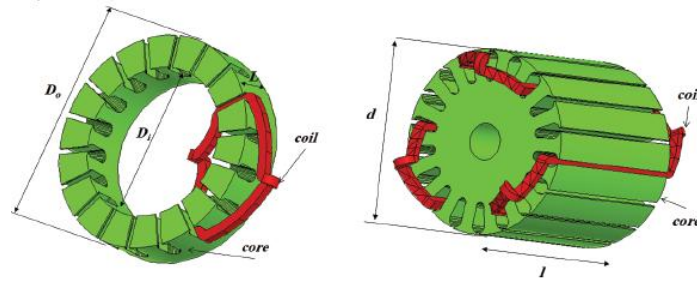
Stator Winding Configurations (a) Axial Flux Machine, (b) Radial Flux Machine
